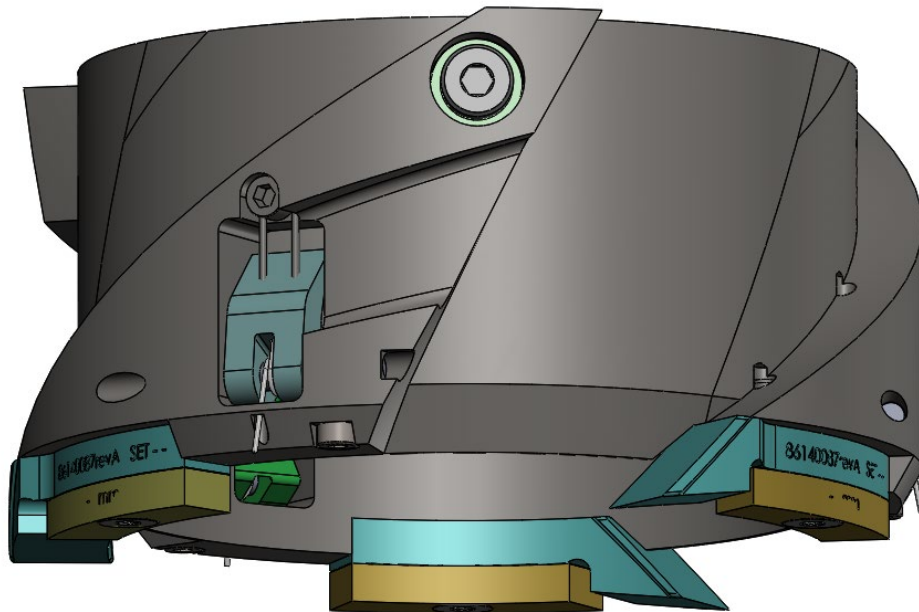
Cutter head assembly configured with standard cutters and long core dogs.
